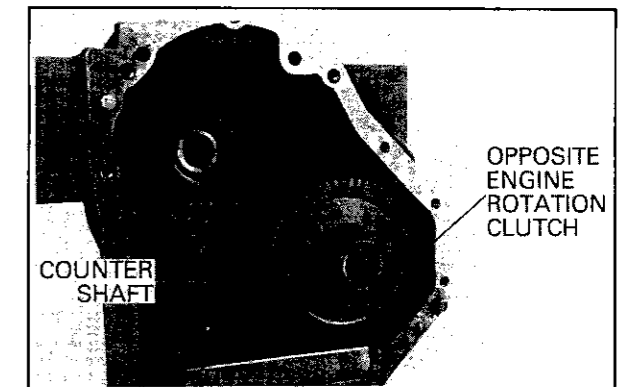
ENGINE ROTATION CLUTCH REMOVAL
